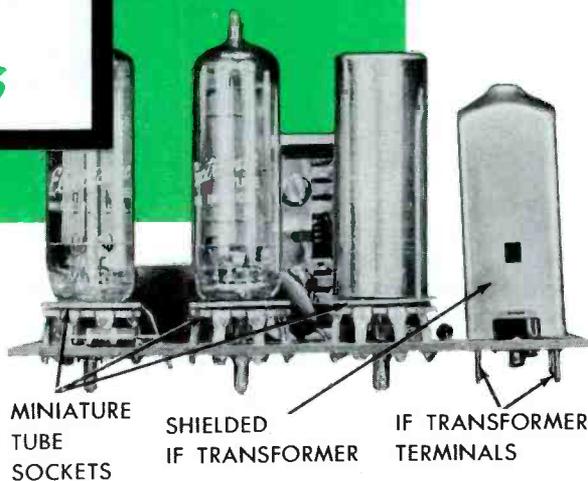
Side View of the Printed-Wiring Board Employed in the General Electric Model 900 Clock Radio.
